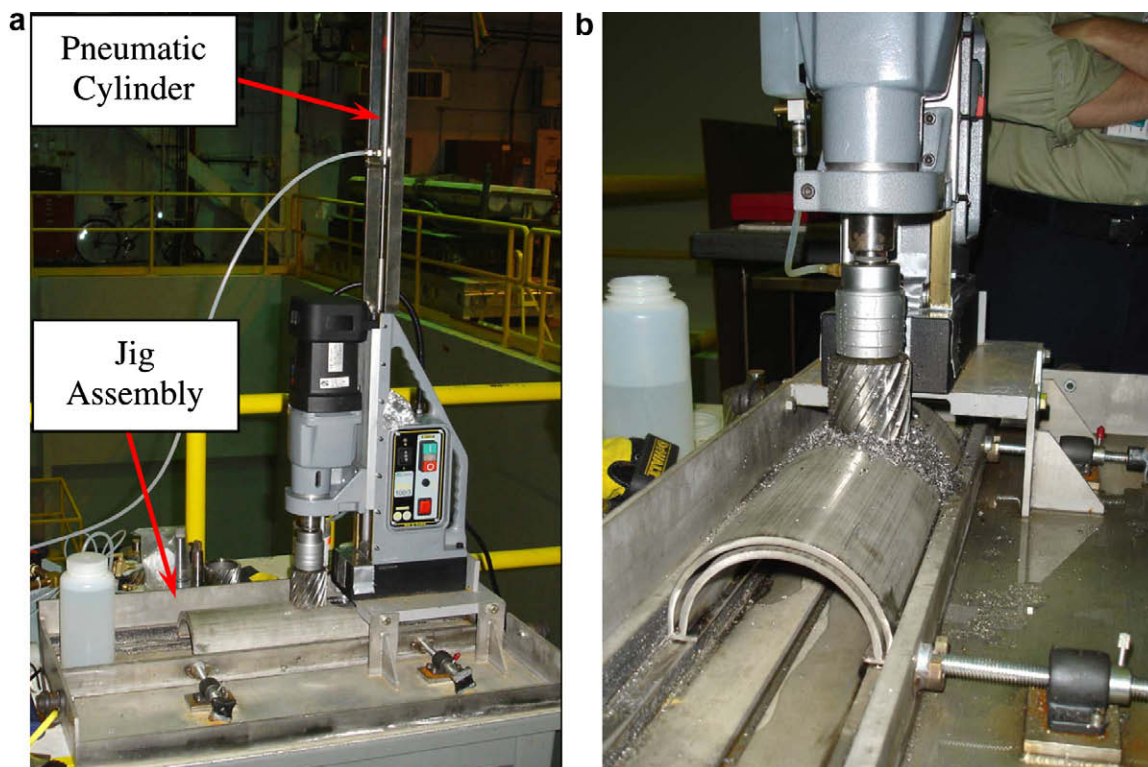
Modified Eurobor[®] annular cutter unit: (a) side view and (b) front view [during trial cut].
